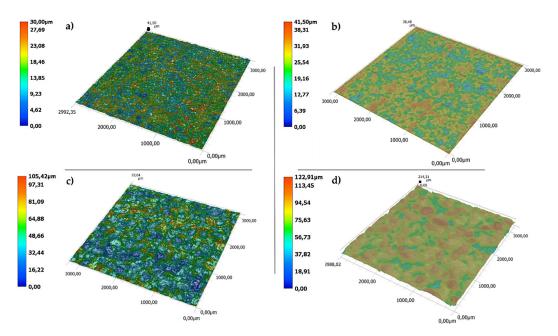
Topography of the tested surfaces of the molding insert and polypropylene moldings obtained using digital microscope: (a) surface of the EDM A molding cavity, (b) surface of the EDM A molding, (c) surface of the EDM A molding cavity, (d) surface of the EDM C molding
